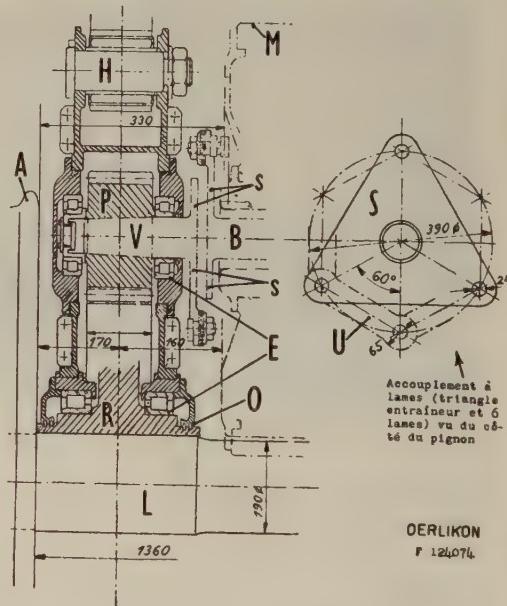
Mechanism of figure 551. Section through axle and motor (cardan shaft) centres. Right, the coupling plate with springs seen from the pinion side.
